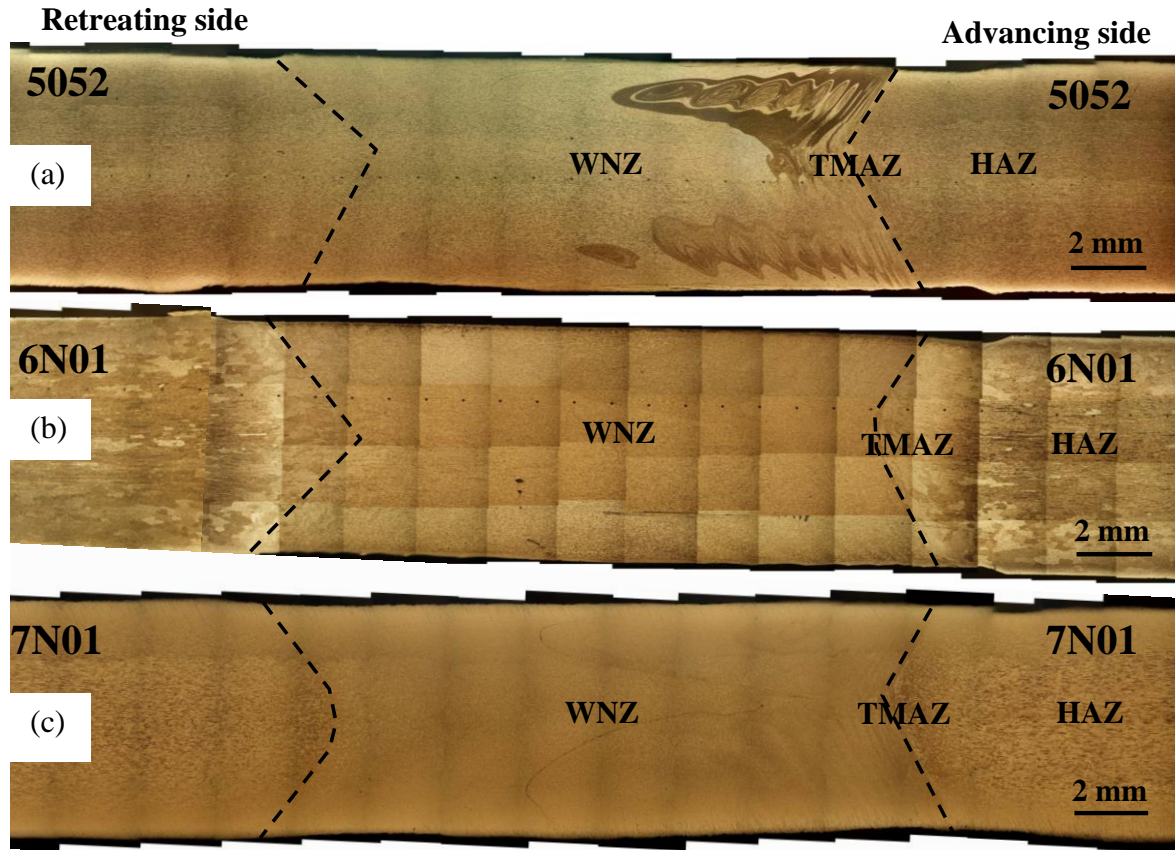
Welded structure in transverse cross-section of FSWed (a) 5052, (b) 6N01 and (c) 7N01 joints.
